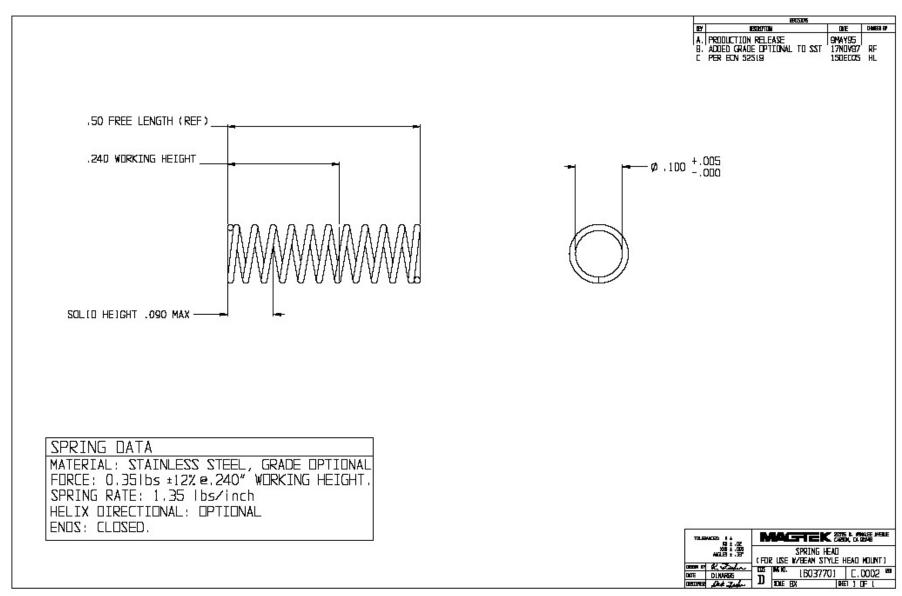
Head Spring (Used for Beam Style Head Mounting)
